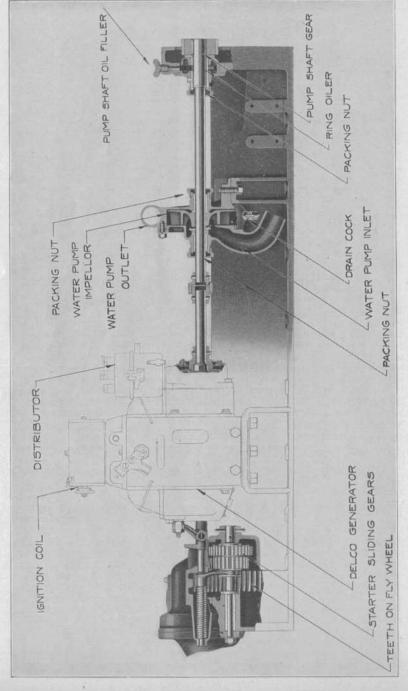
Section Through Water Pump and Starter Sliding Gears.
